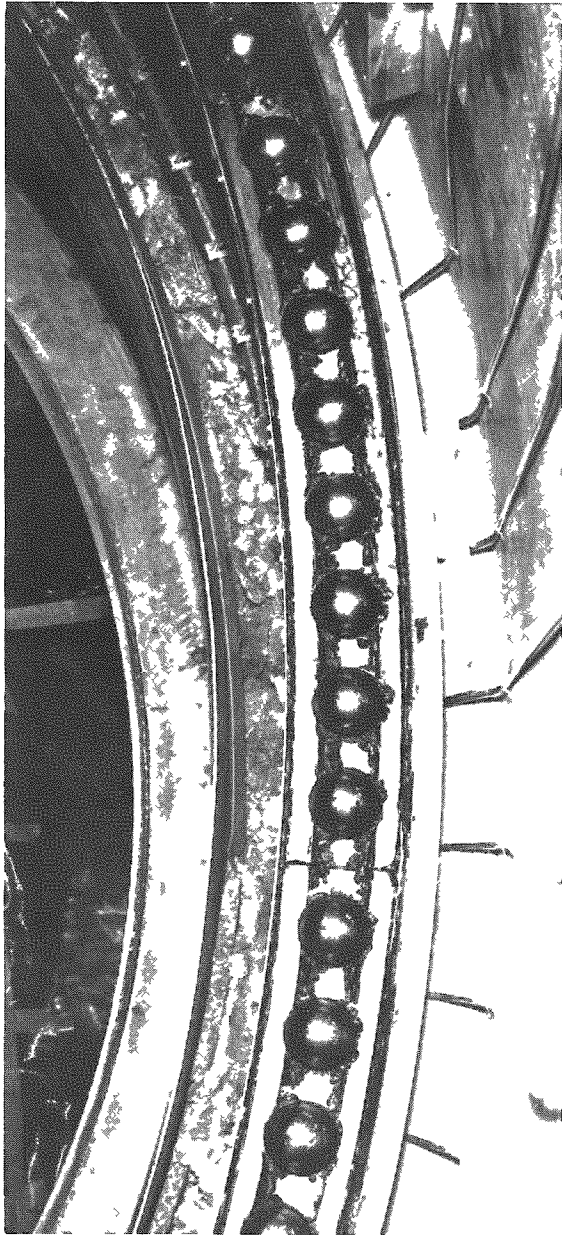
View of Large Rotating Plug Seal Trough after Plug Removal
